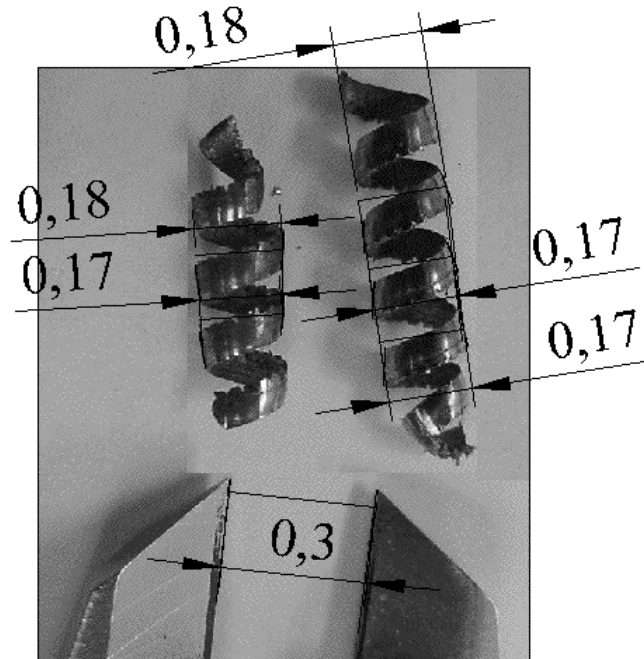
Chip Dimensions Produced by 0.05 in. Depth of Cut and 0.011 in/rev Feed Rate
